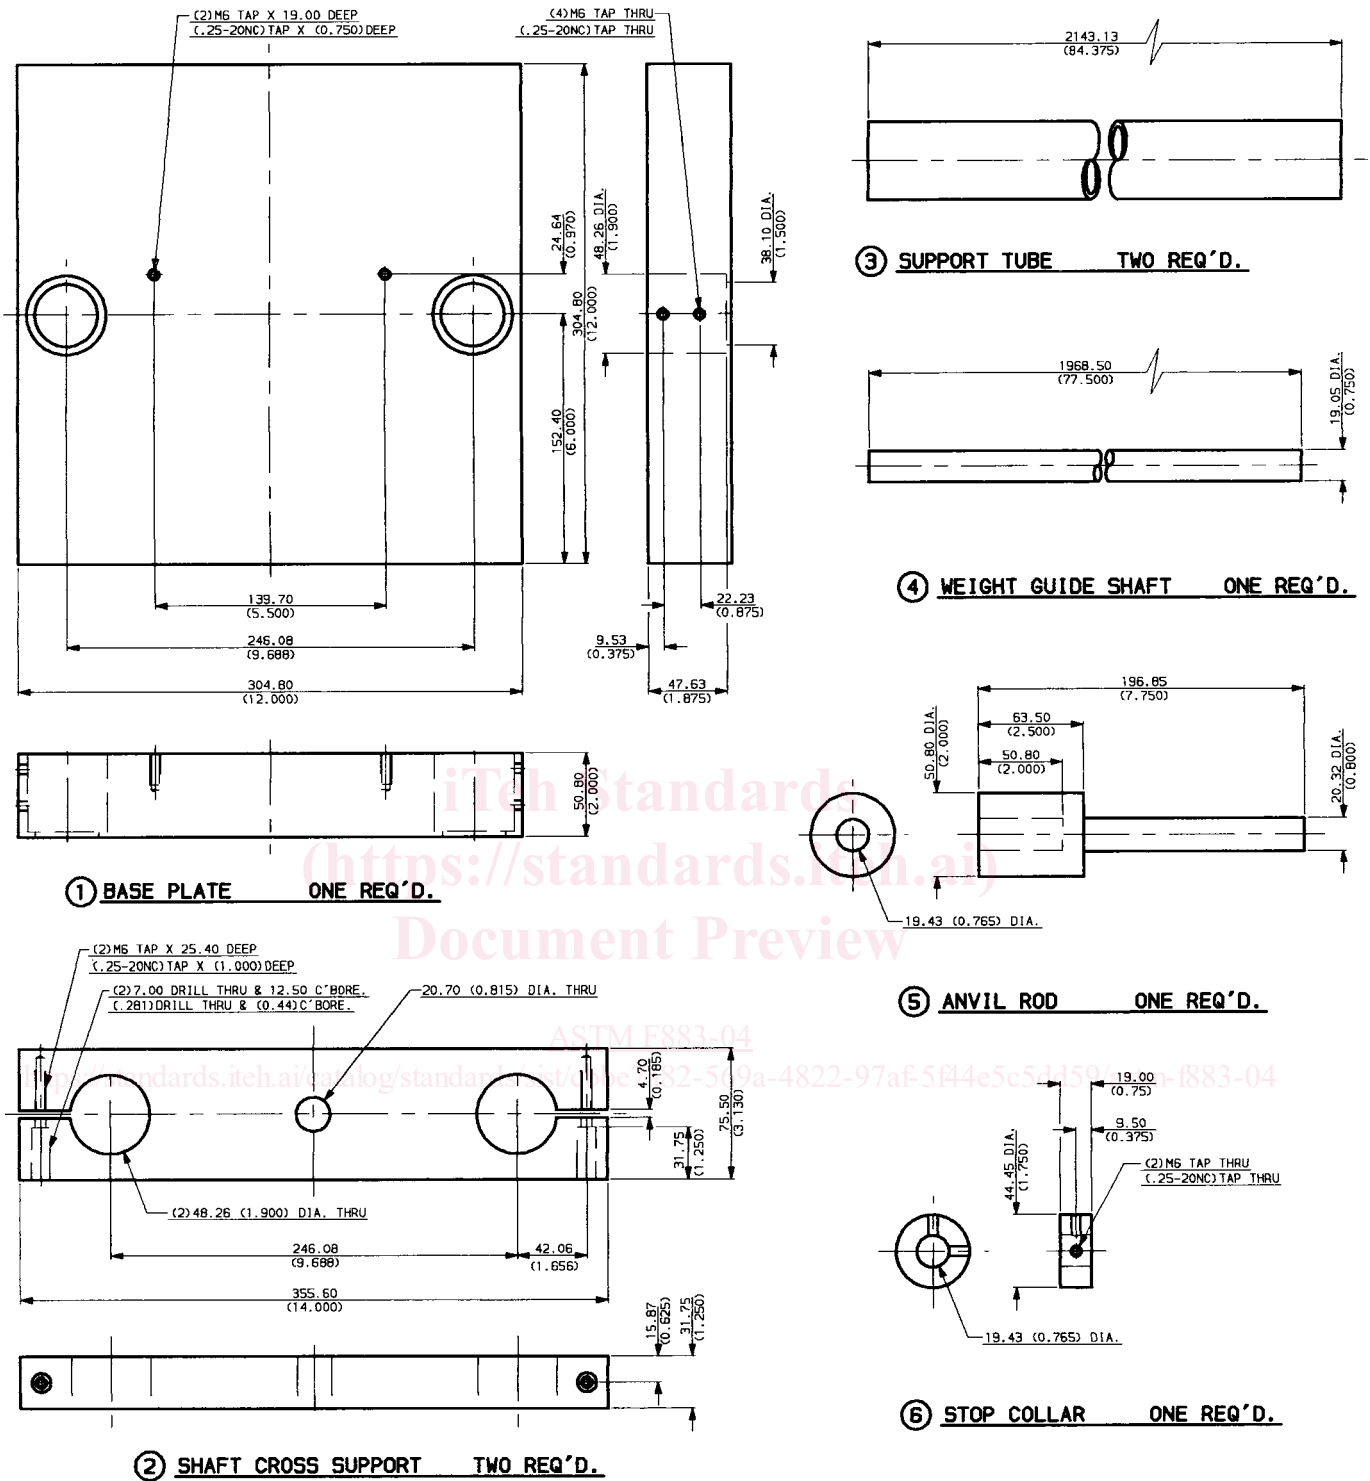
(Sheet 1) Shock Impactor (See Table 5 for Bill of Material)
